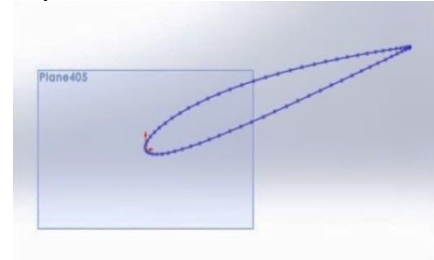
Airfoil or Hydrofoil Section of the Impeller
